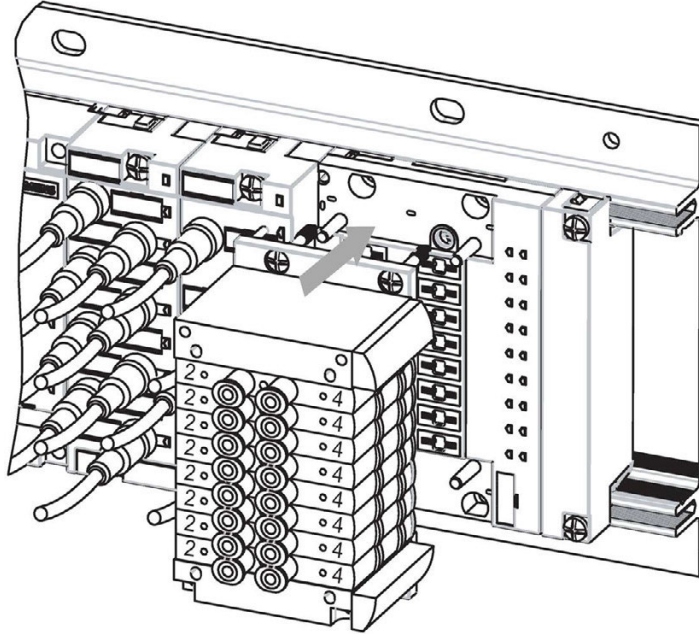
Mounting the FESTO valve terminal on the pneumatic interface module
